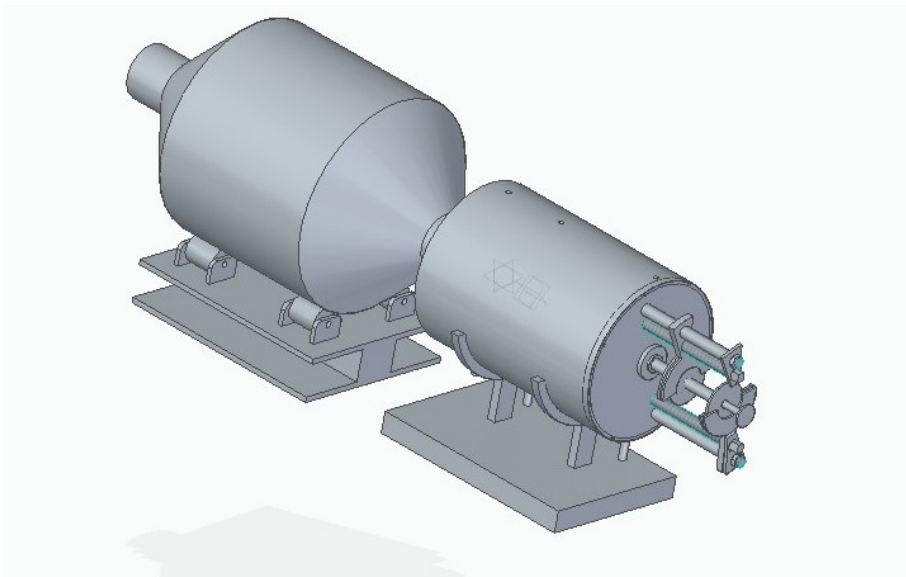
Three dimensional view of ball mill hydro-squeeze
